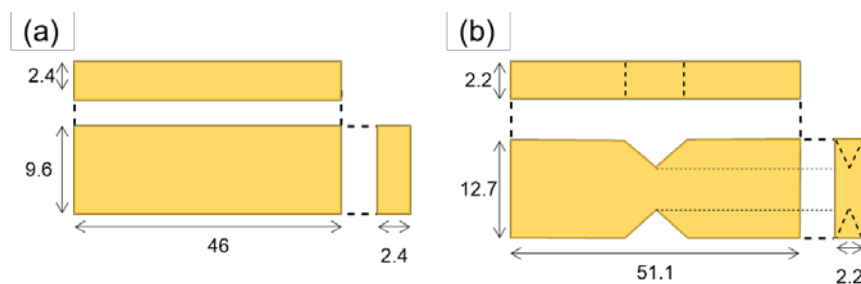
Schematic drawing of the specimens. (a) CP1. (b) CP2. Dimensions in mm.
